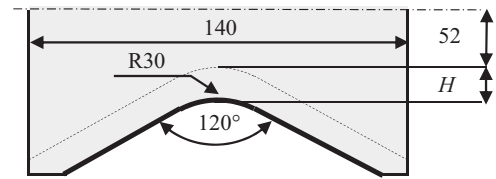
Specimen geometry used for the stretch-flanging tests.
